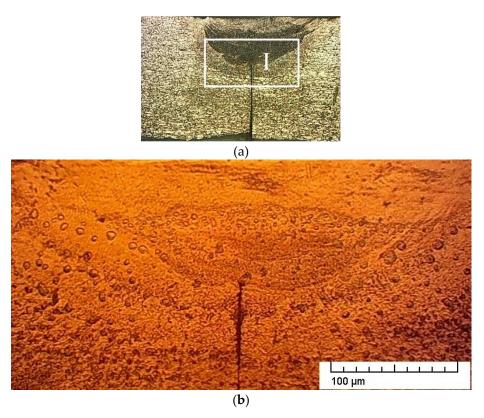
Top view of the welded joint, created by welding the three-layered MPM samples alternately on both sides.
